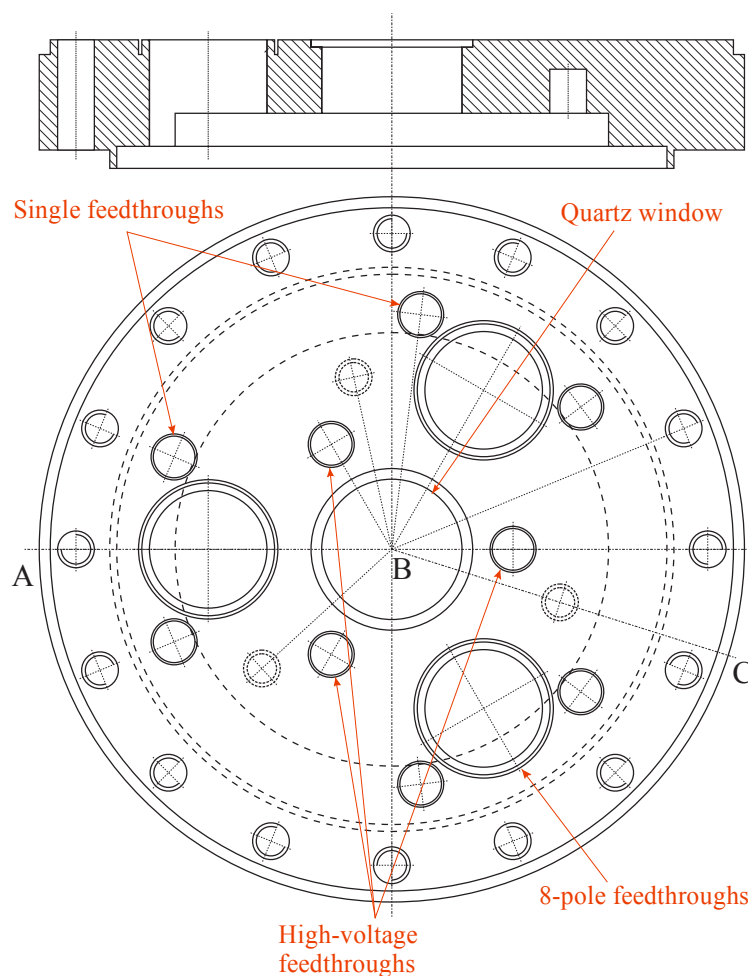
Technical design of the UMF-flange (Unterer Montageflansch).
